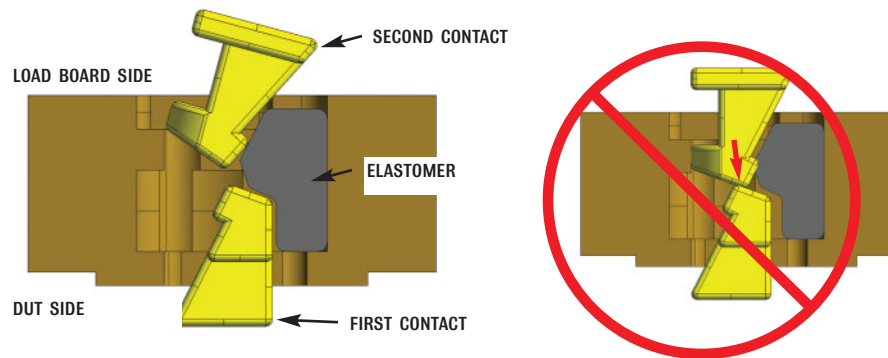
SLIDE THE SECOND CONTACT PAST THE FIRST; AVOID PUSHING THE SECOND CONTACT ON THE FIRST CONTACT.
